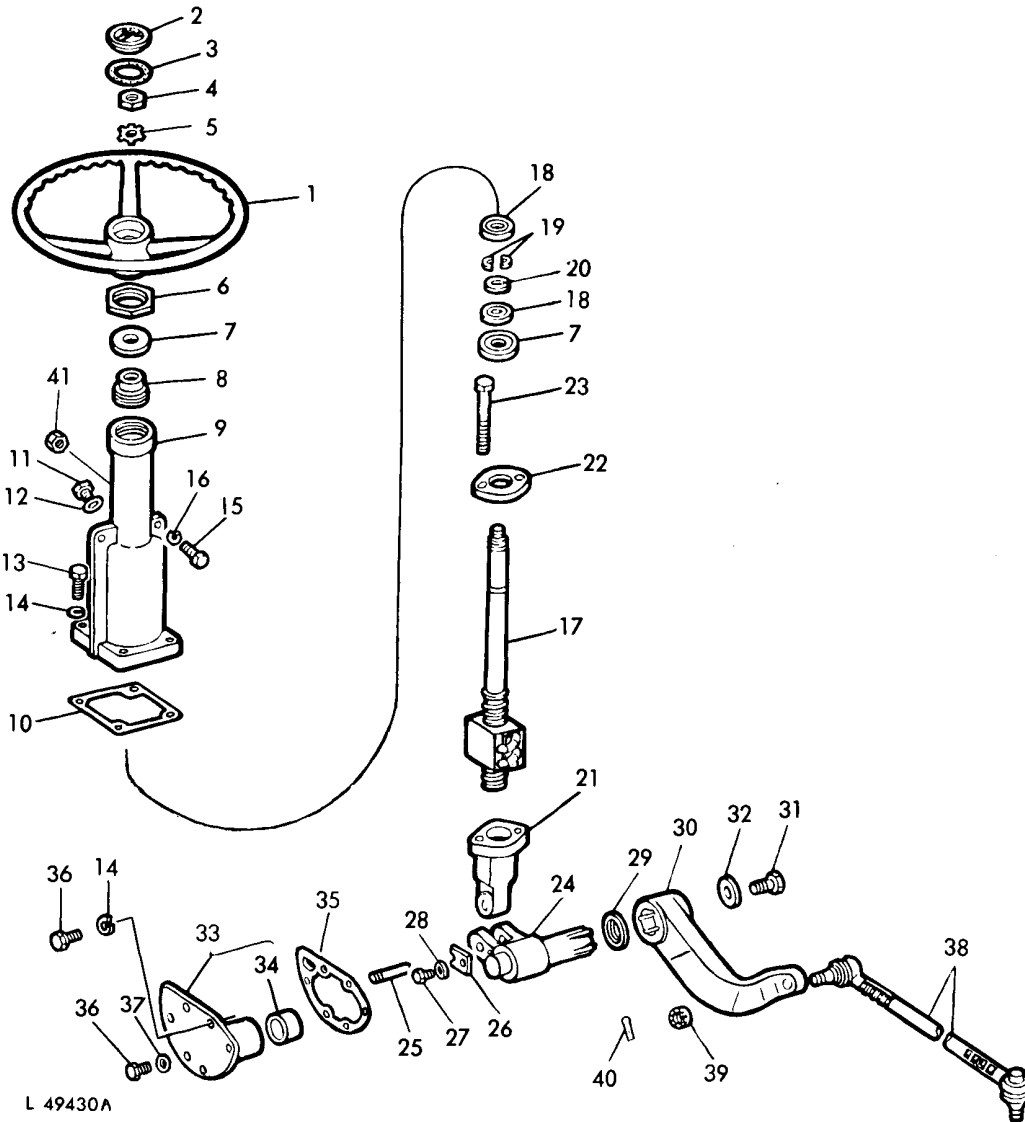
Parts of Steering Housing Assembly and Steering Linkage
